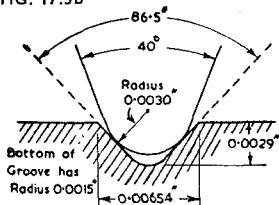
B. Cross-sectional view of typical record groove and needle tip.
